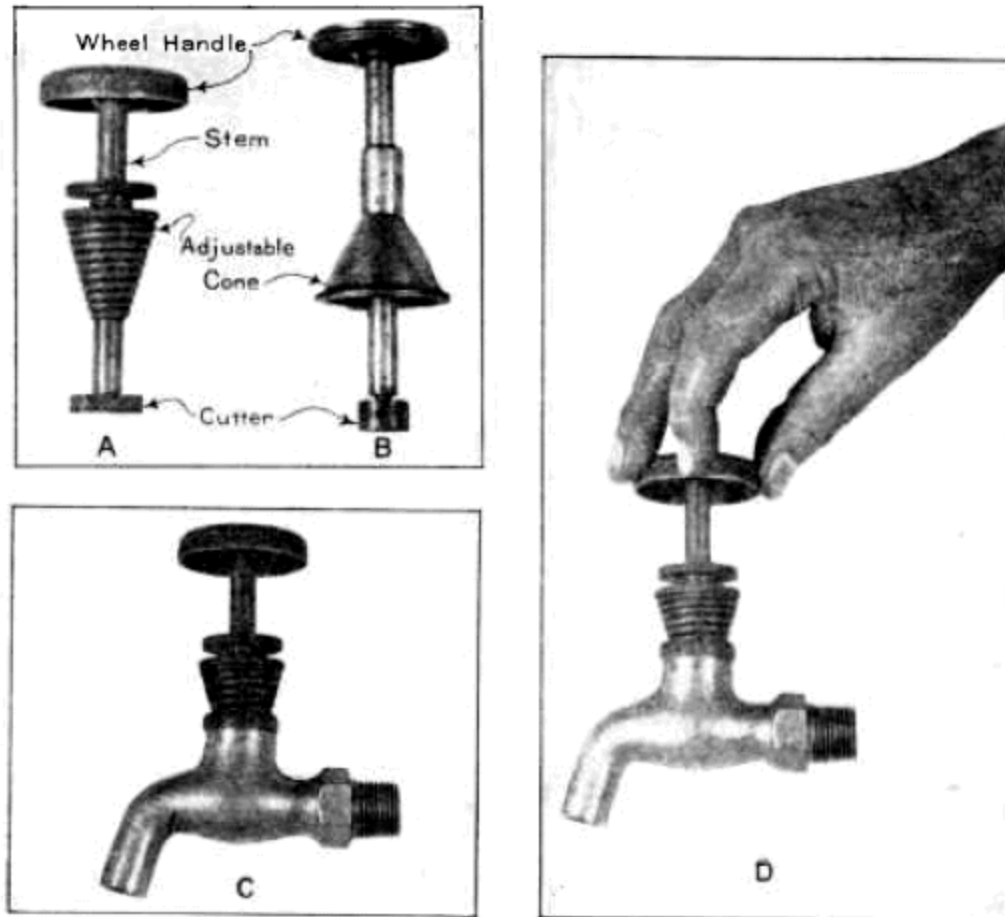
Faucet seat dressers: A, dresser with inside adjustable cone; B, dresser with outside adjustable cone; C, dresser A screwed into a compression faucet; D, rotating the wheel handle and cutter.
